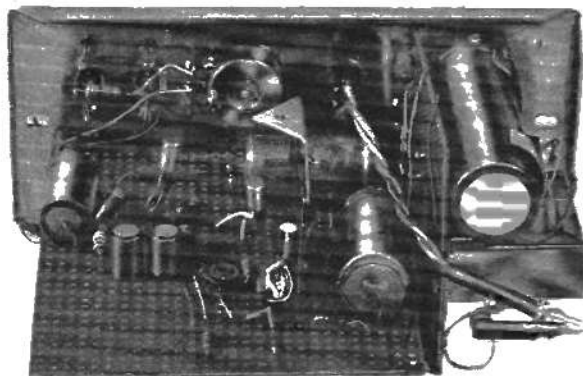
Layout and wiring of the complete amplifier. Shown for clarity, with boards removed.
